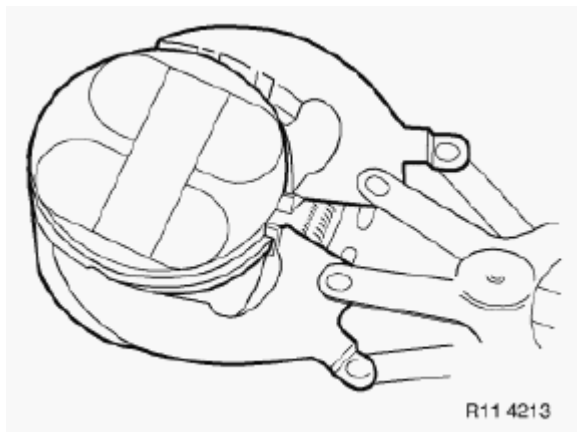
Removing Plain Compression Ring And Stepped Ring With Piston Ring Pliers
